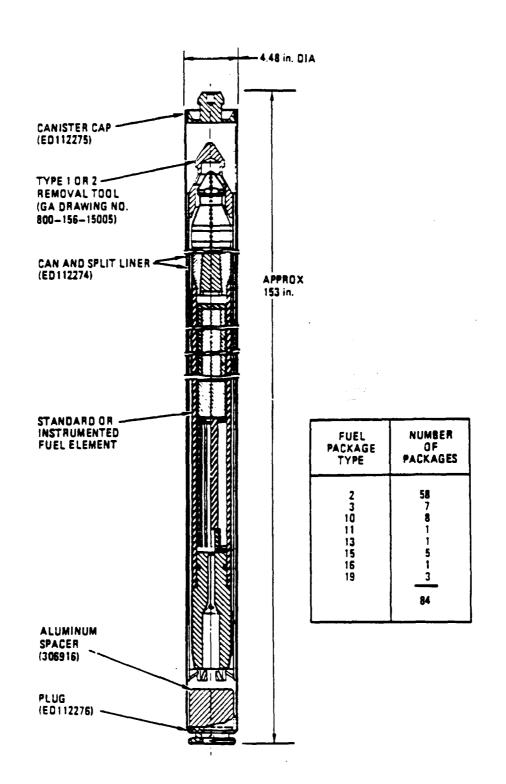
D.7. PB1/1 fuel element in storage canister with removal tool.
